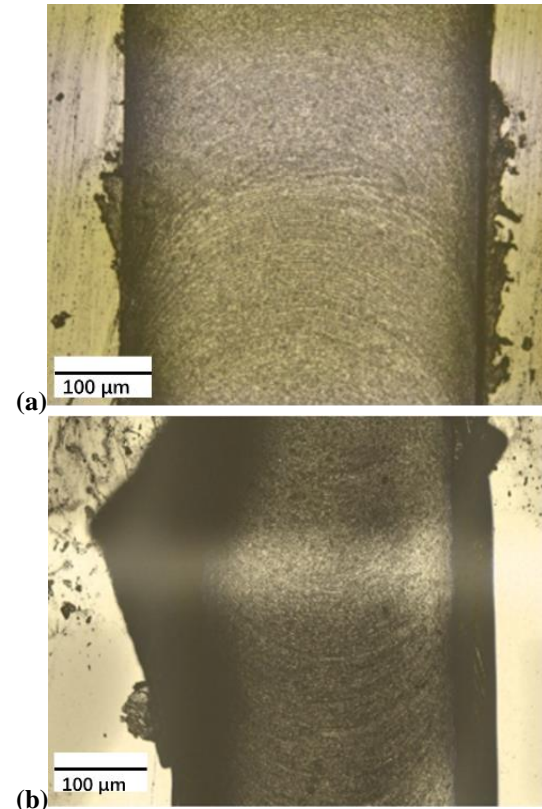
Surface roughness with different feed rate, (a) Cutting depth 0.2 mm, spindle speed 6000 r/min (b) Cutting depth 0.4 mm, spindle speed 6000 r/min.
